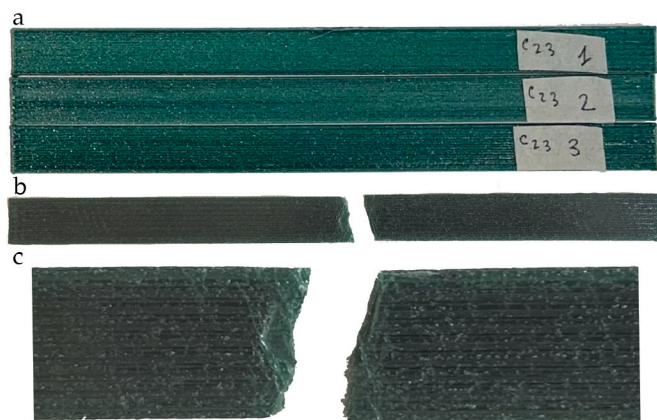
(a) Shows three 3D-printed tensile test samples labeled P23, (b) displays a specimen post-tensile test with evident separation, and (c) is a close-up of the fracture surface revealing the failure pattern.
